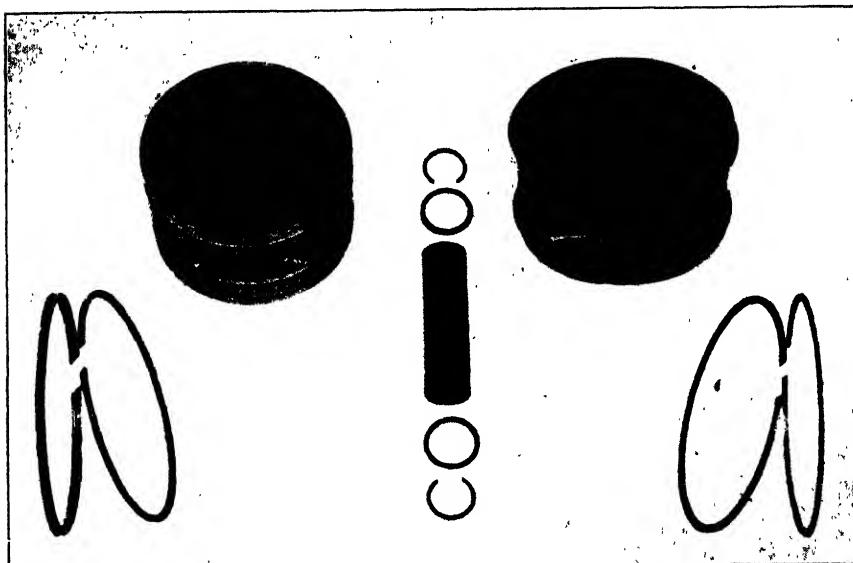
Piston and Rings, showing Gudgeon Pin and Circlips.
